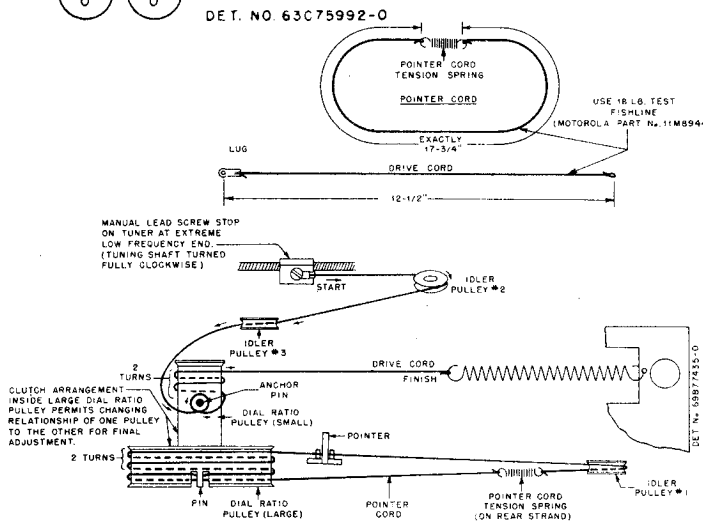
POINTER AND DRIVE CORD RESTRINGING DETAIL
